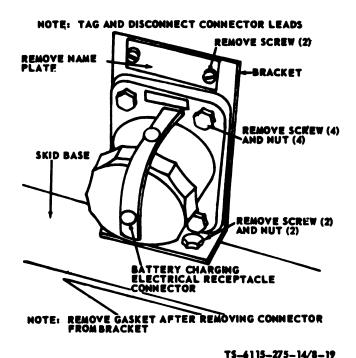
Battery charging electrical receptacle connector and bracket, removal and installation (Model MEP-018A).
